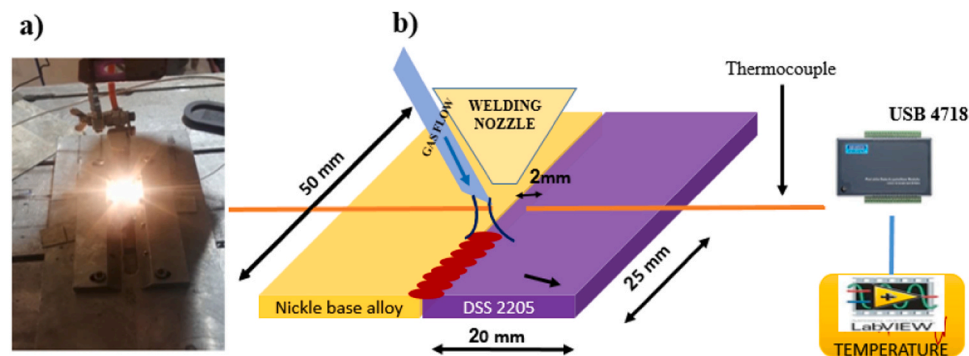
Laser welding experimental configuration, a) actual view, b) schematic view.
